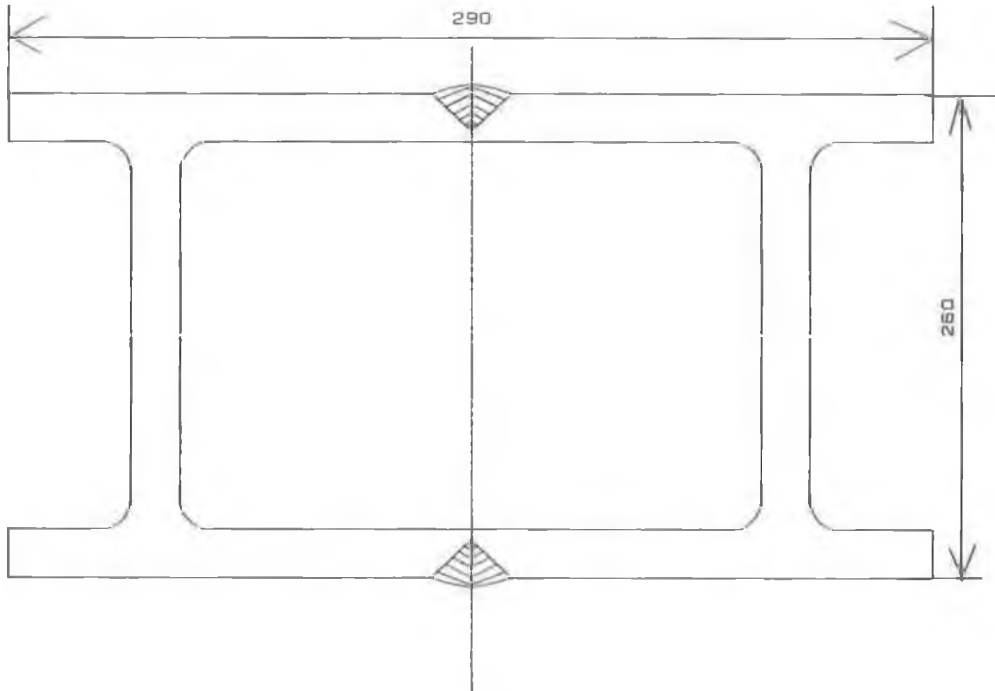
DRAWING OF THE I-BEAM BOX-SECTION COMPONENT.
